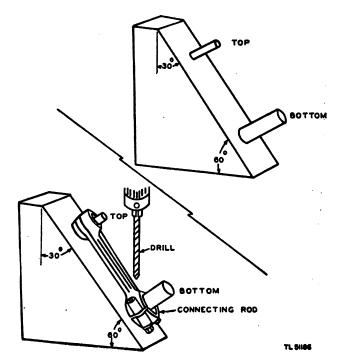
Jig for drilling oil holes in Briggs and Stratton connecting rod.
